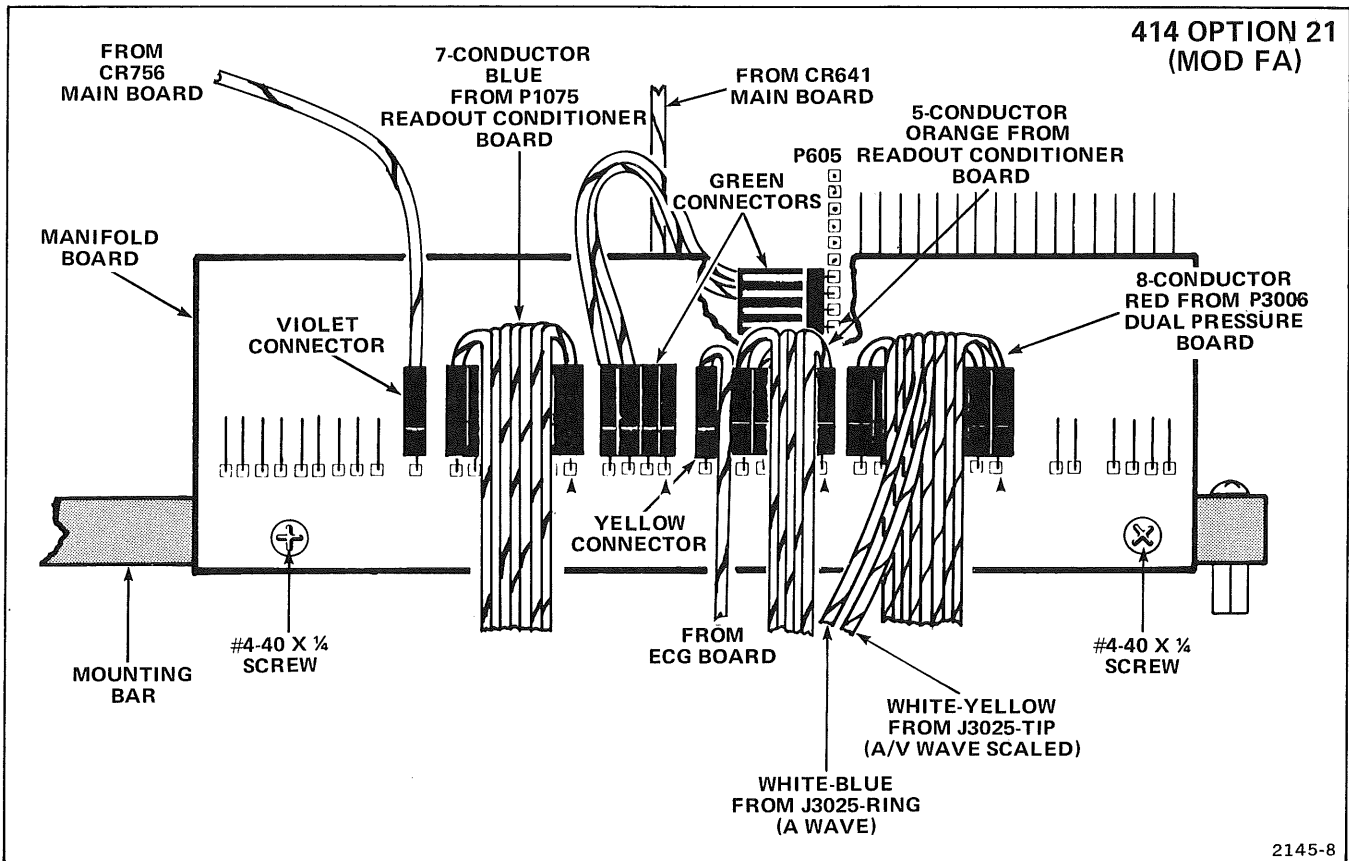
Installing Manifold Board and connecting cables in 414 Option 21 (MOD FA).
